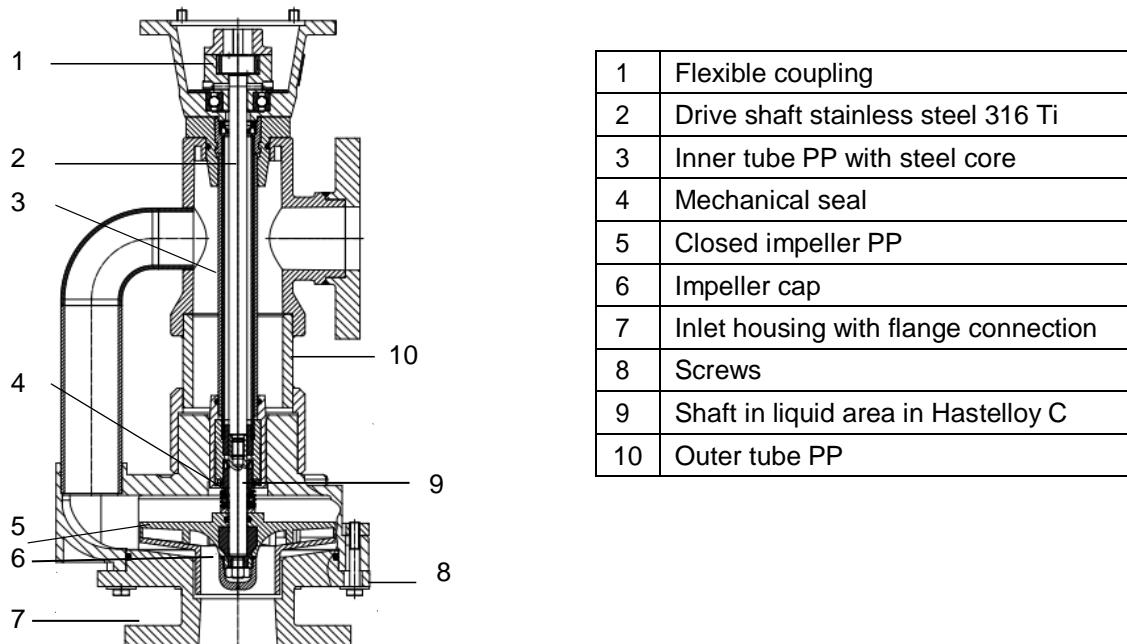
Cross-section of F 640 PP-230 TR (sample view)
